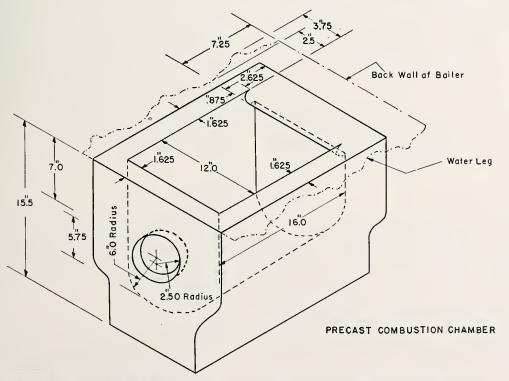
Precast combustion chamber consisting of eight pieces of refractory fitted together.
